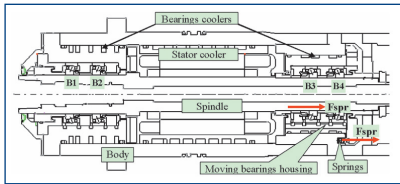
High-speed headstock with spring tensioning spindle bearing.
